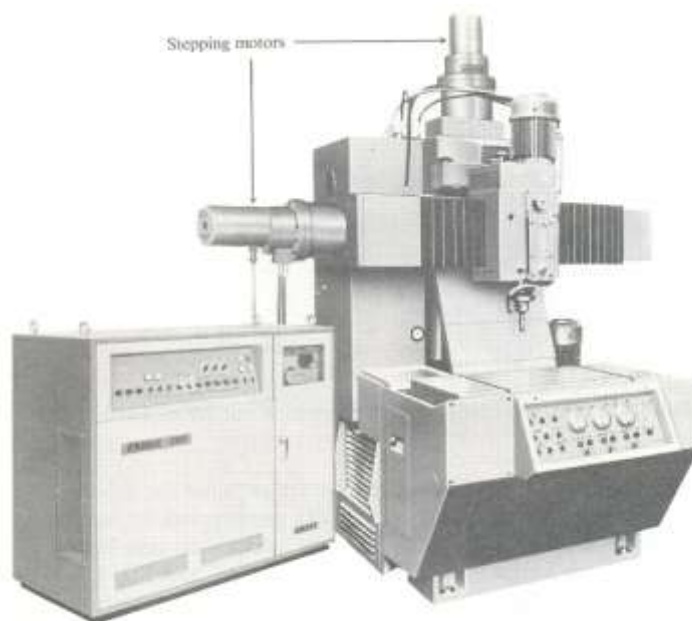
A numerically controlled milling machine using electrohydraulic stepping motors (Courtesy of Fanuc Ltd.)
